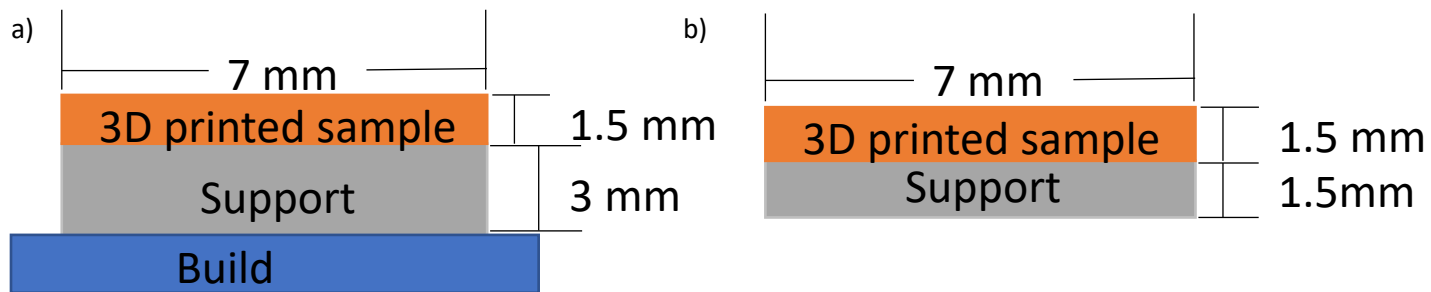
3D Print Dimensions a) on vs b) off the build plate
